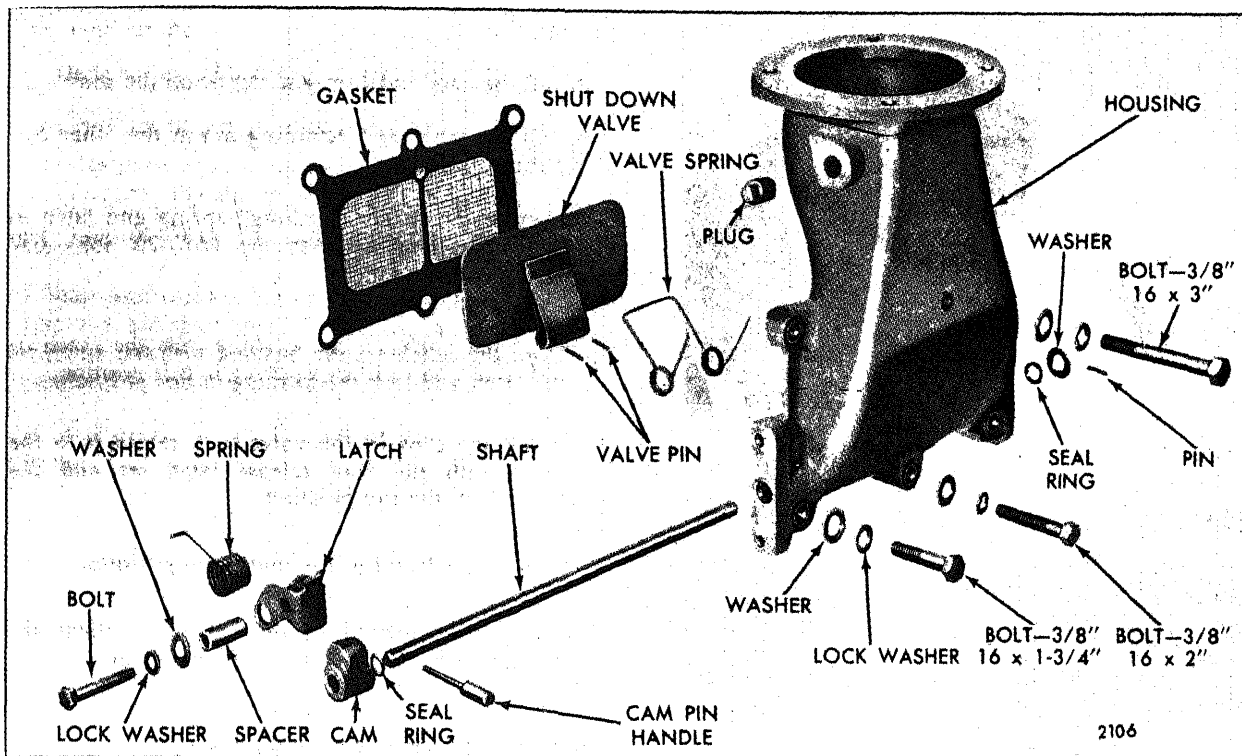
Typical In-Line Air Shut-Down Housing Details and Relative Location of Parts
